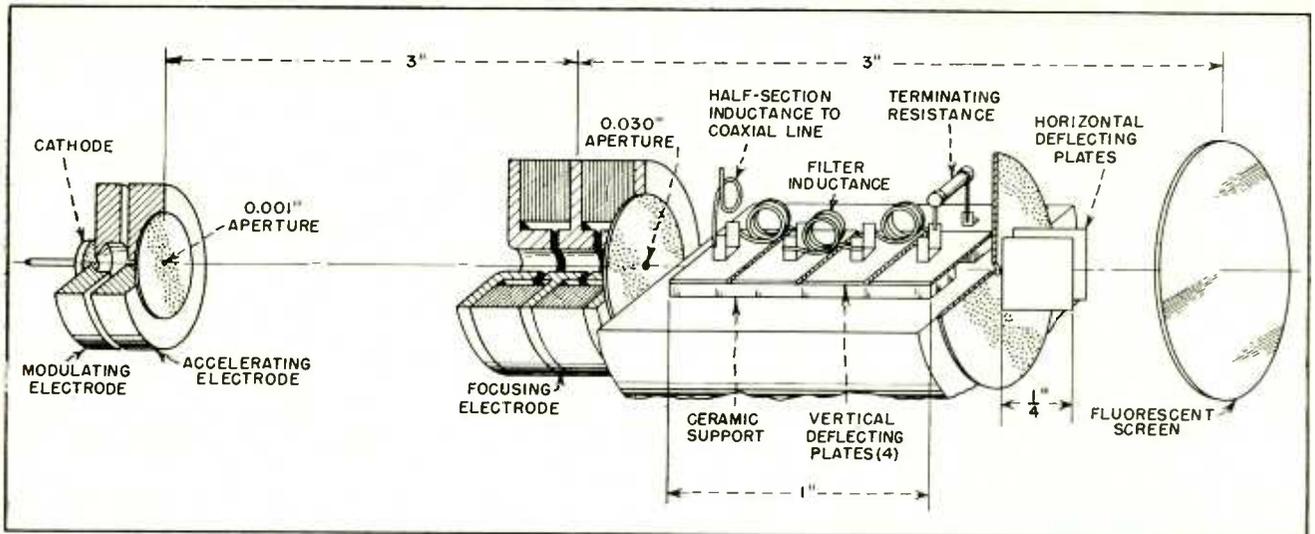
Mechanical drawing showing construction of the traveling-wave oscilloscope tube. Structural elements are not shown
